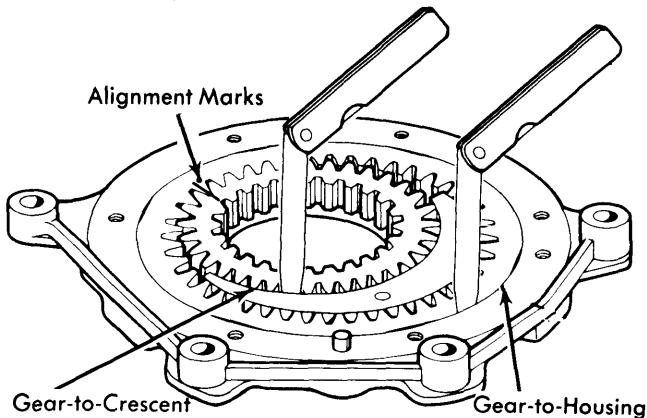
Correct Procedure to Measure Oil Pump Clearances
